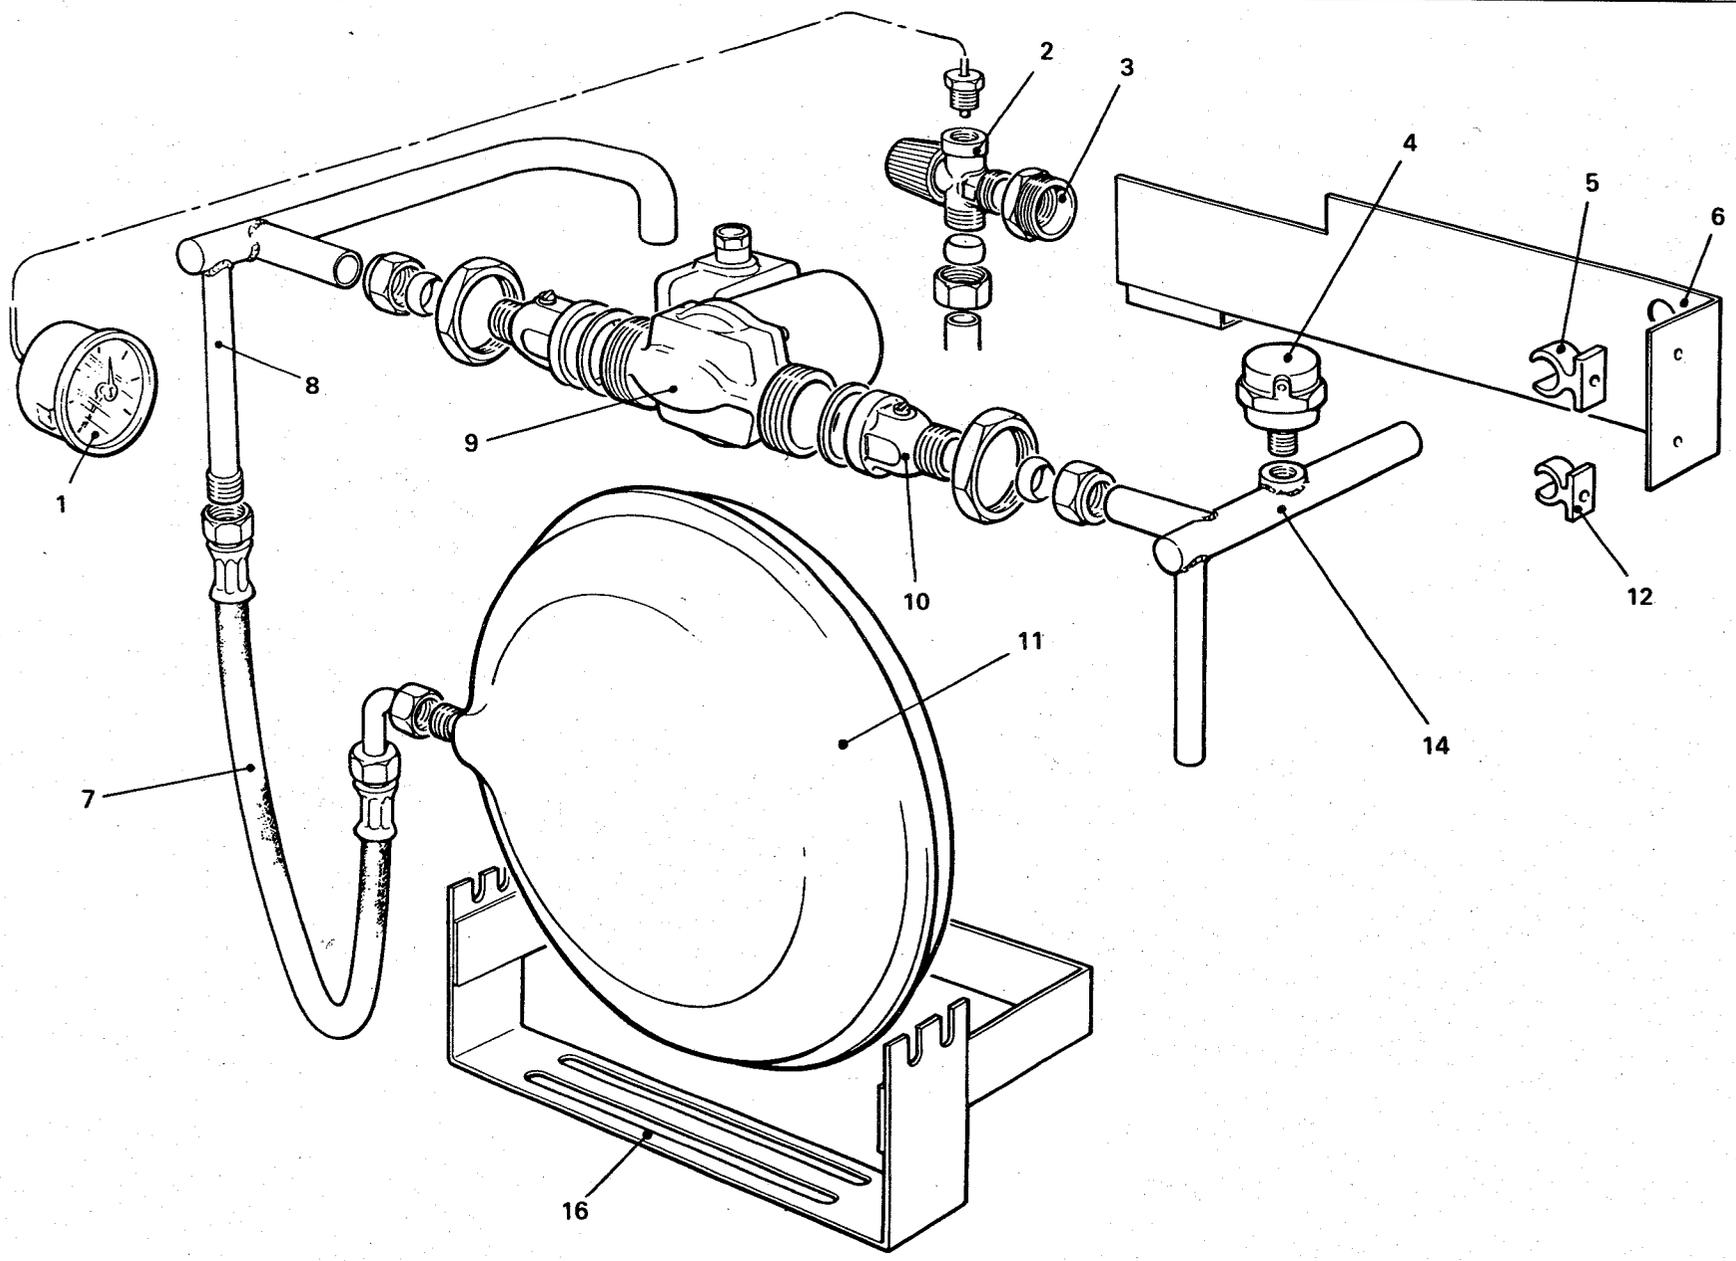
SYSTEM COMPONENTS EXPLODED VIEW
